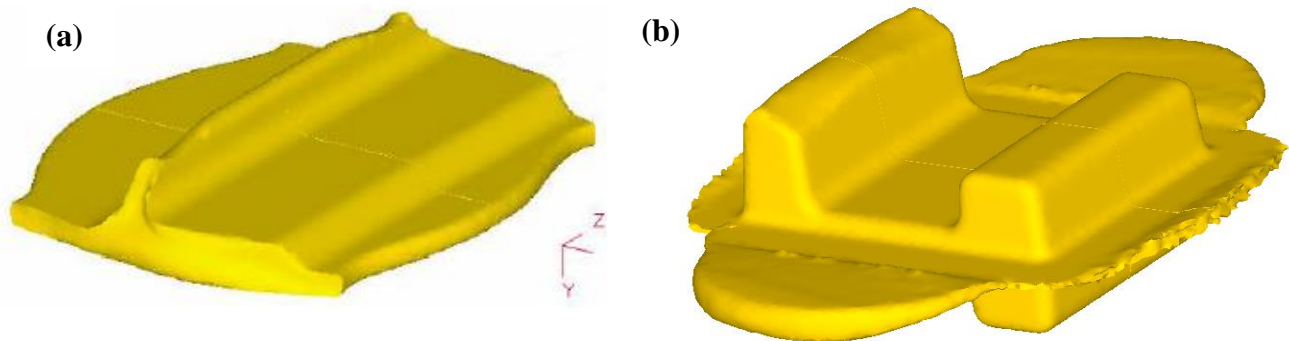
a) Coin forging specimen b) I - beam forging specimen.
